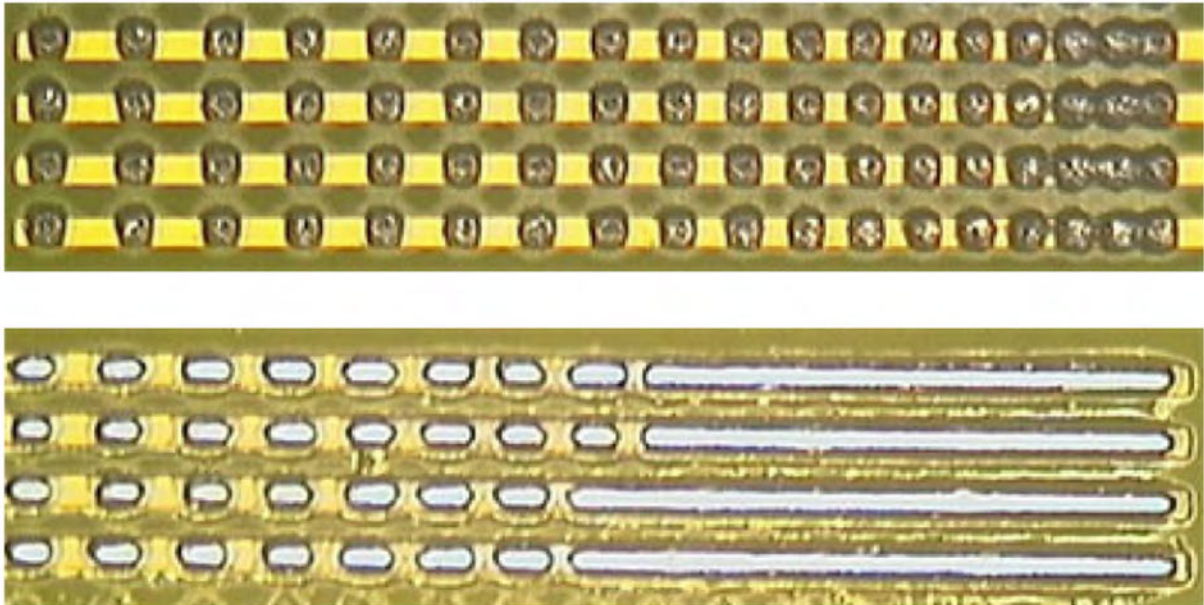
Example of solder spot test. Top shows solder spots added to tracks with reducing distance between features. Bottom shows coalesced spots after reflow heating of board.
